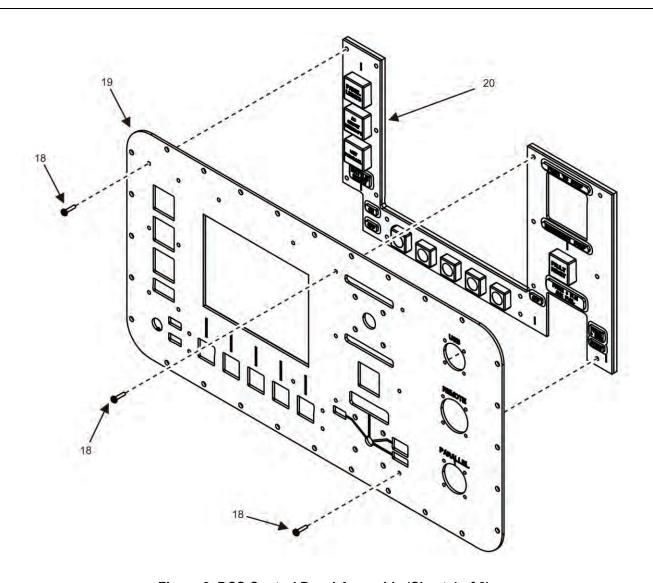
DCS Control Panel Assembly (Sheet 4 of 6).
